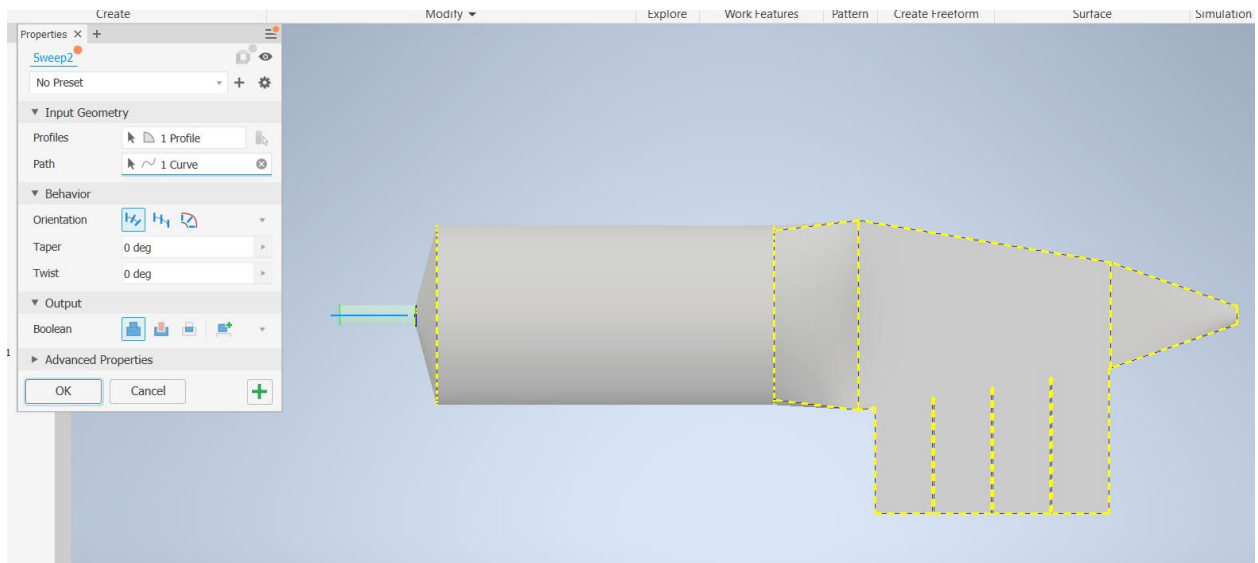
Completing the outlet port using the “Sweep” tool.
